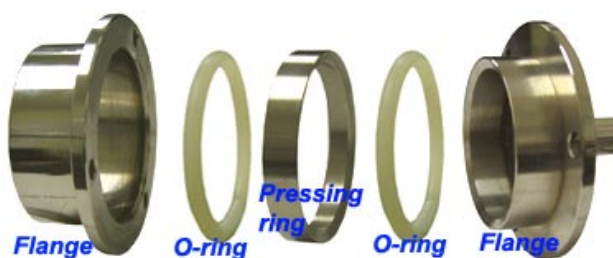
Flanges with two silicon O-rings for vacuum tightening (MTI Co., CA).
